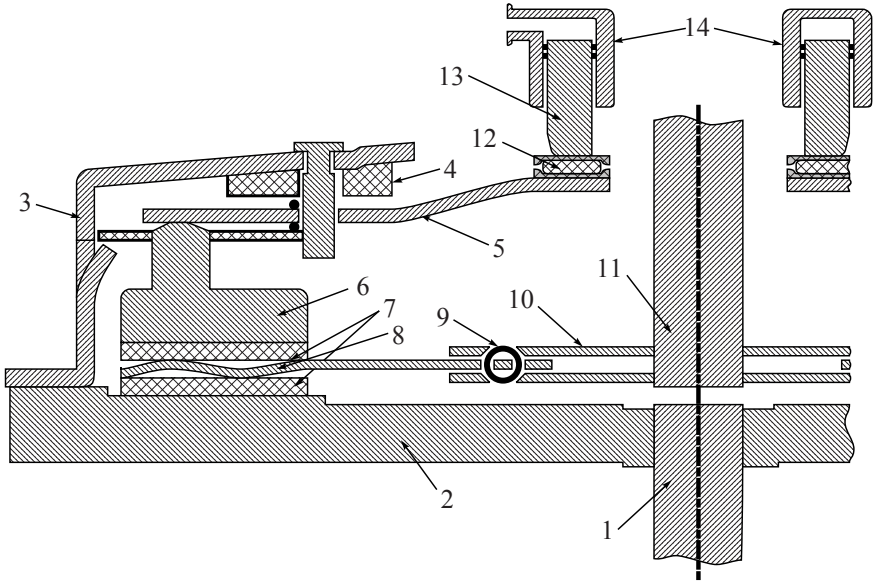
Clutch structure, axial cut. 1 crankshaft 2 flywheel 3 clutch external structure 4 wear-compensation system 5 washer spring 6 pressure plate 7 friction pads 8 flat spring 9 spring damper 10 clutch disk 11 gearbox primary shaft 12 needle roller bearing 13 concentric slave cylinder (CSC) piston 14 concentric slave cylinder (CSC)
